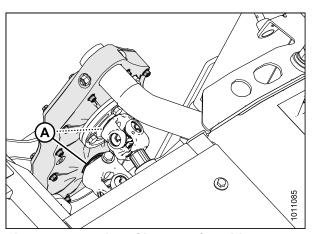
Right Side Roll Conditioner Gearbox Bearings
